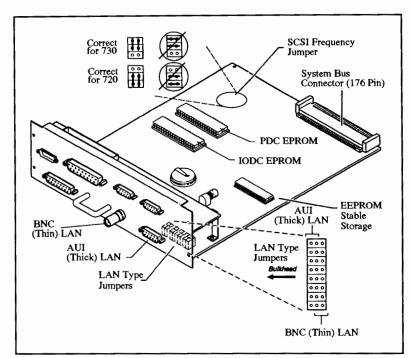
Component and Jumper Locations on the System (core I/O) Card
